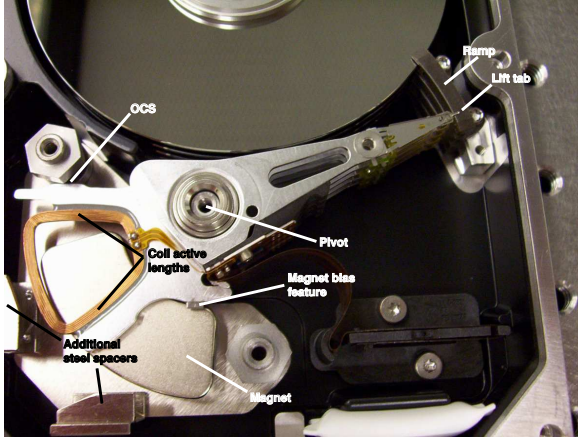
Conventional disc drive outfitted with ramp. Top magnet removed for clarity
